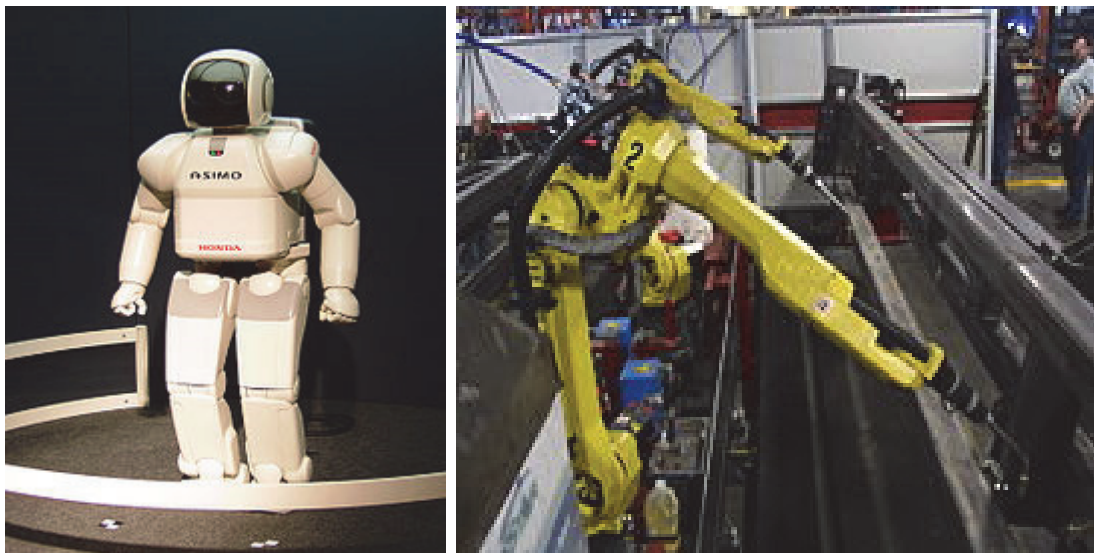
(a) ASIMO Robot and (b) Welding Robot [1]
